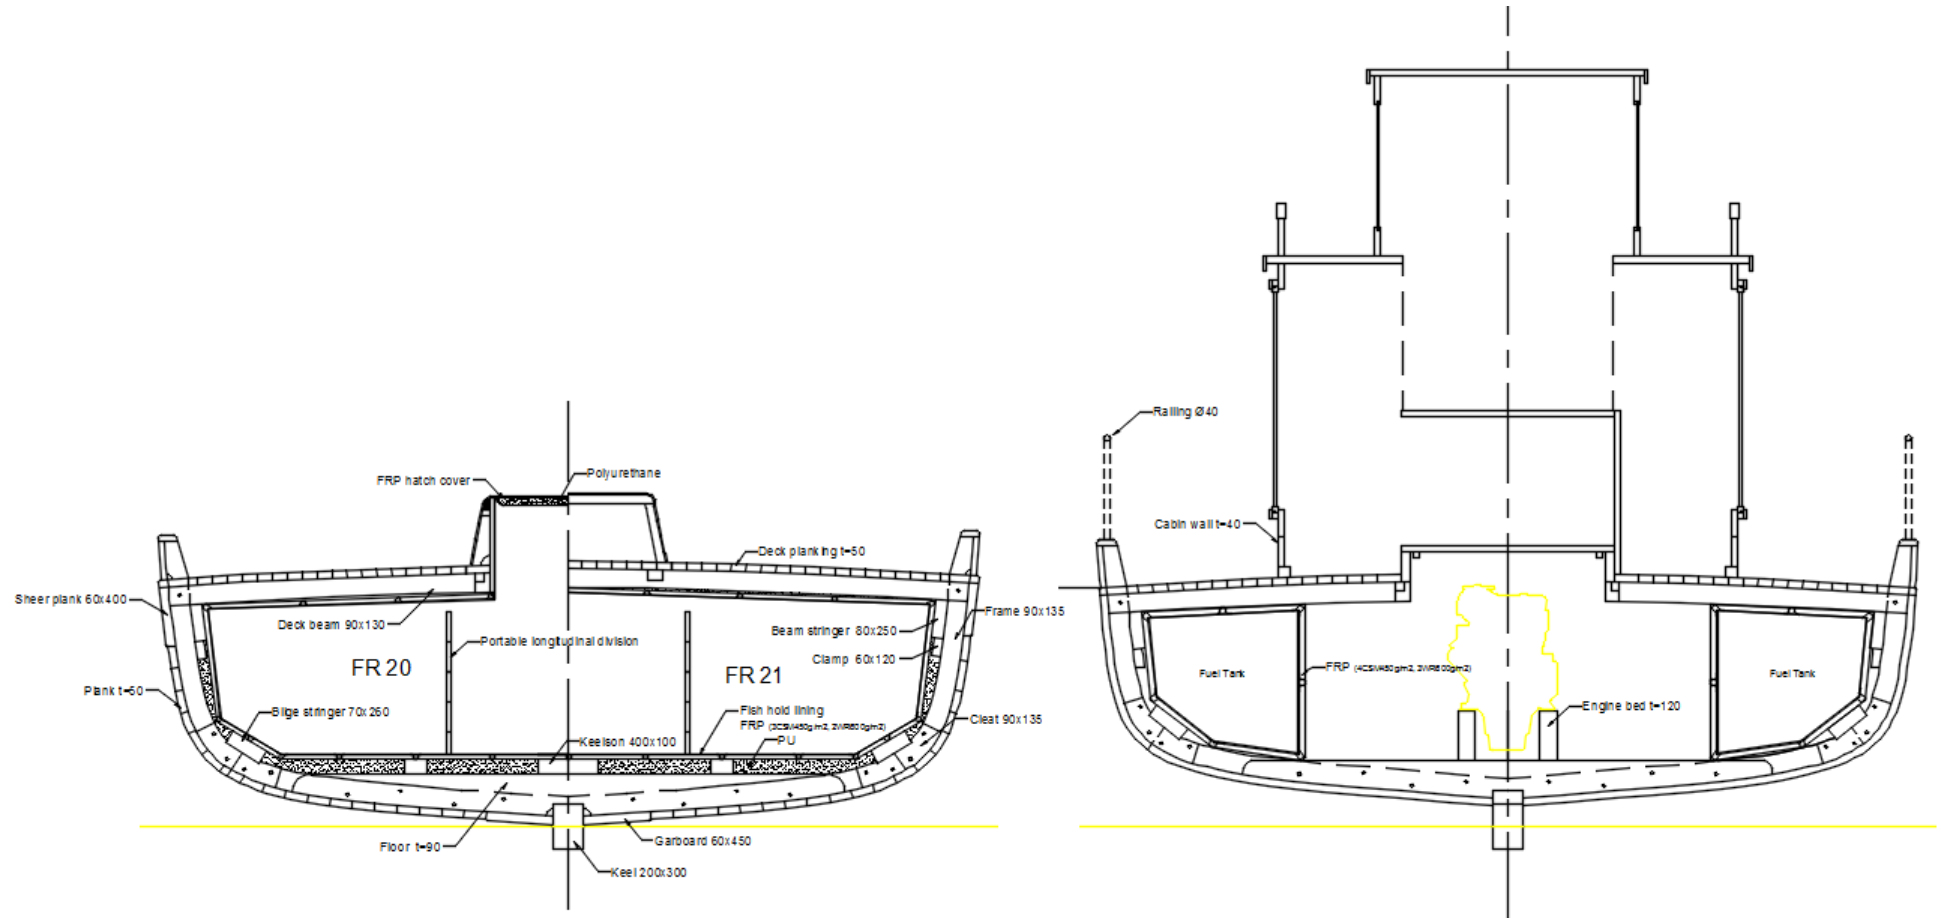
Longitudinal Structure Wooden Proposed Vessel
